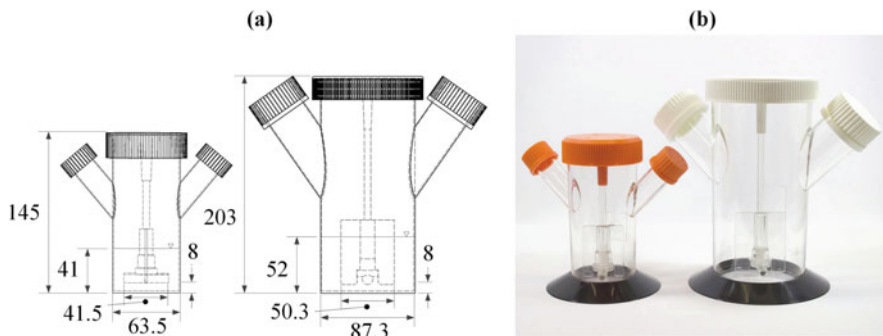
Small-scale SU Corning spinner flasks (125 and 500 mL) [89]. (a) Technical drawings with the main geometrical dimensions (mm). (b) Picture of the spinner flasks
